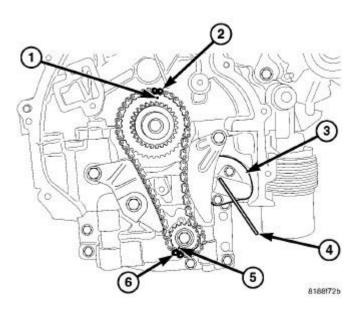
Oil Pump Drive Chain, Oil Pump Drive Chain Tensioner & Timing Marks On Chain Courtesy of CHRYSLER GROUP, LLC
